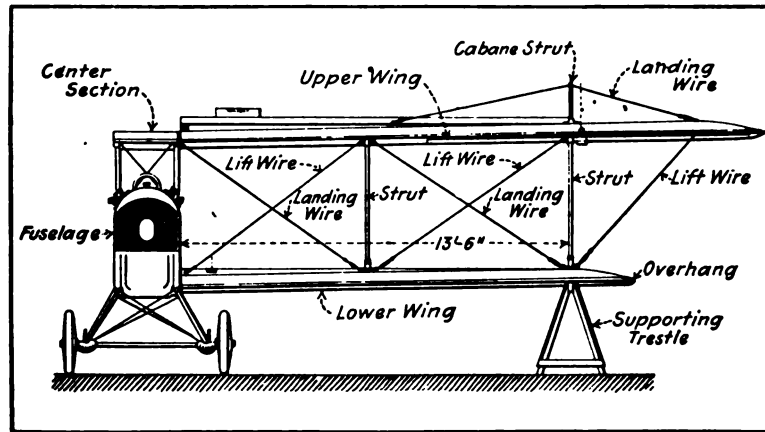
Diagram Showing How Braced Biplane Wing Assembly Forms a Complete Structure That May Be Easily Assembled as a Unit to Biplane Fuselage.
